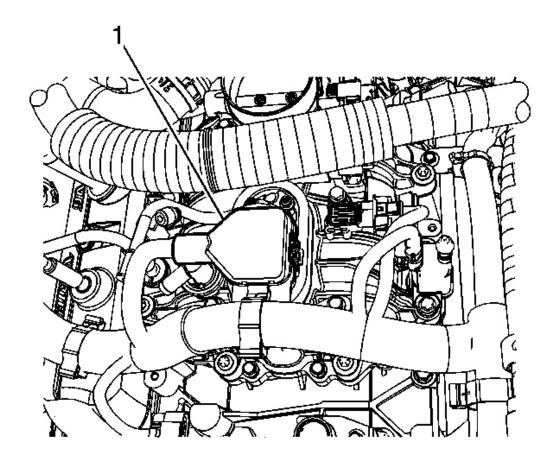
Control Port Injector Module Courtesy of GENERAL MOTORS CORP.
